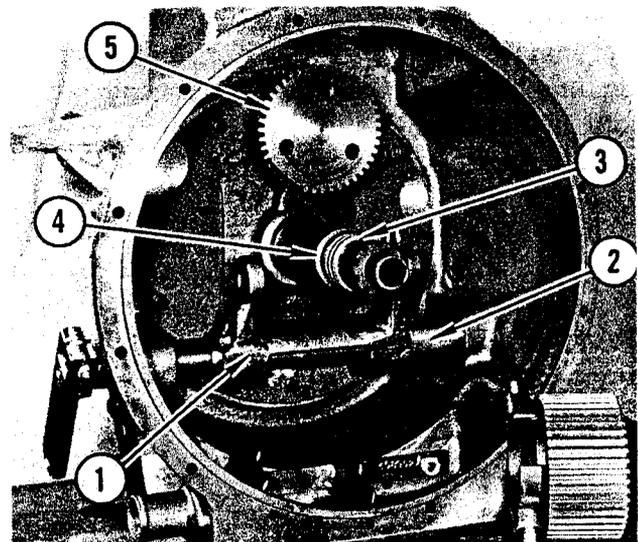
SHIFTER FORK ASSEMBLY INSTALLED
